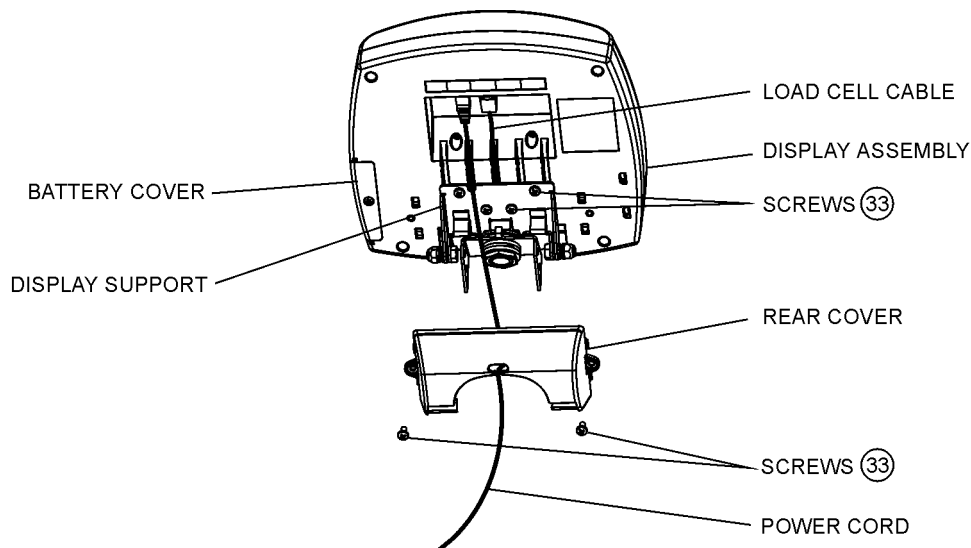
(refer to the Parts List on page 22 for details on parts followed by (#))
